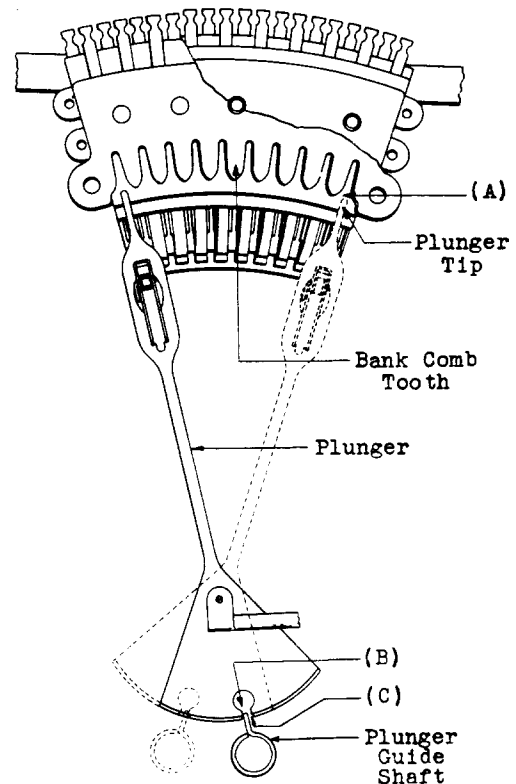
Relation of Plunger to Guide Shaft and Bank Comb
